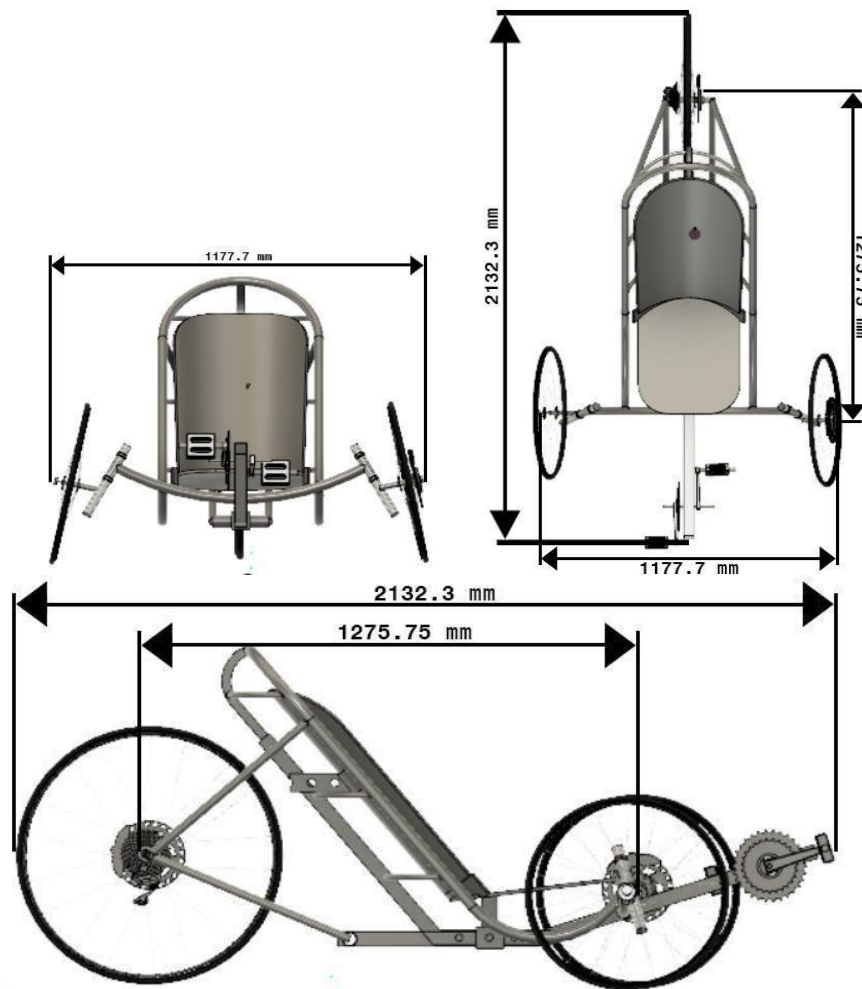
Front View Figure 2- Top View Figure 3- Side View
